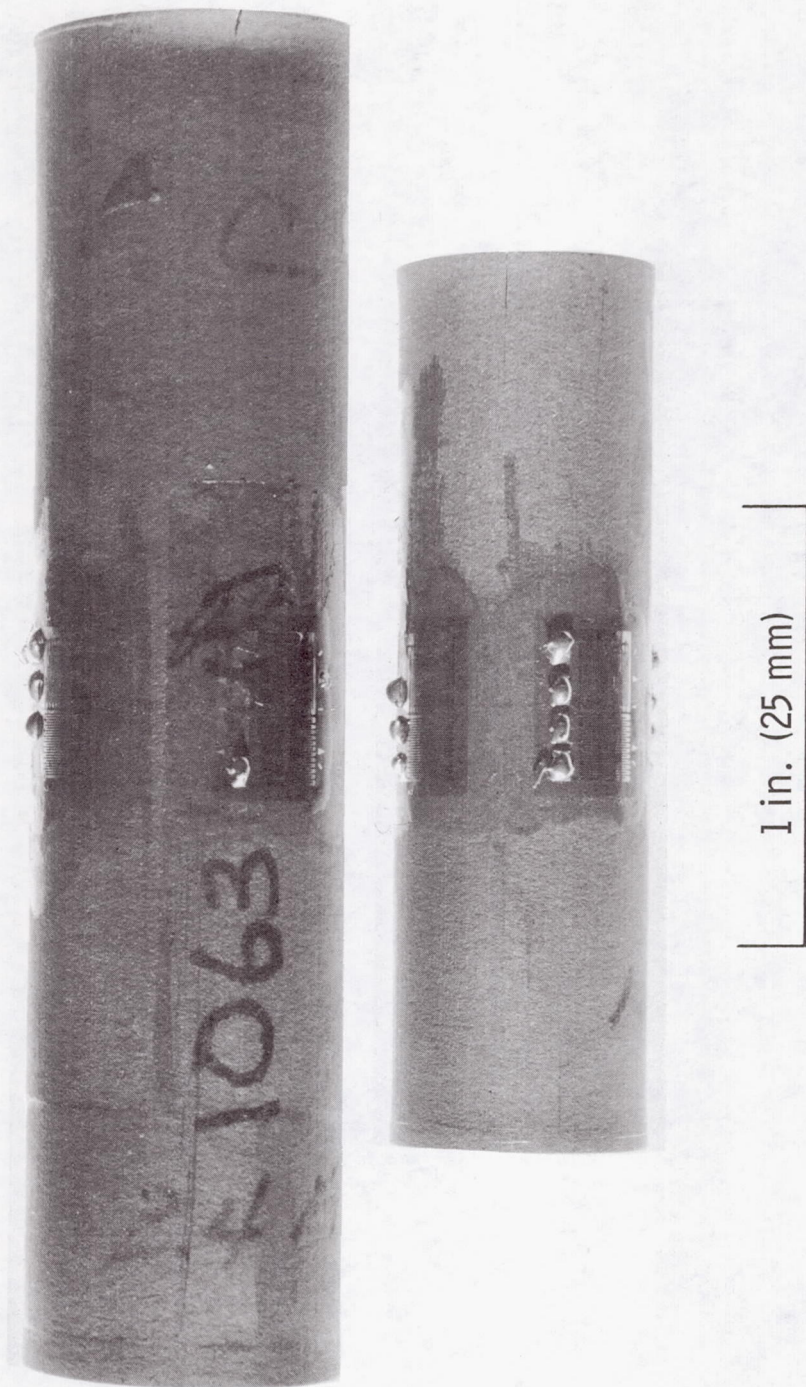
Typical tensile fracture modes of extruded Be-38Al alloy tubing.
